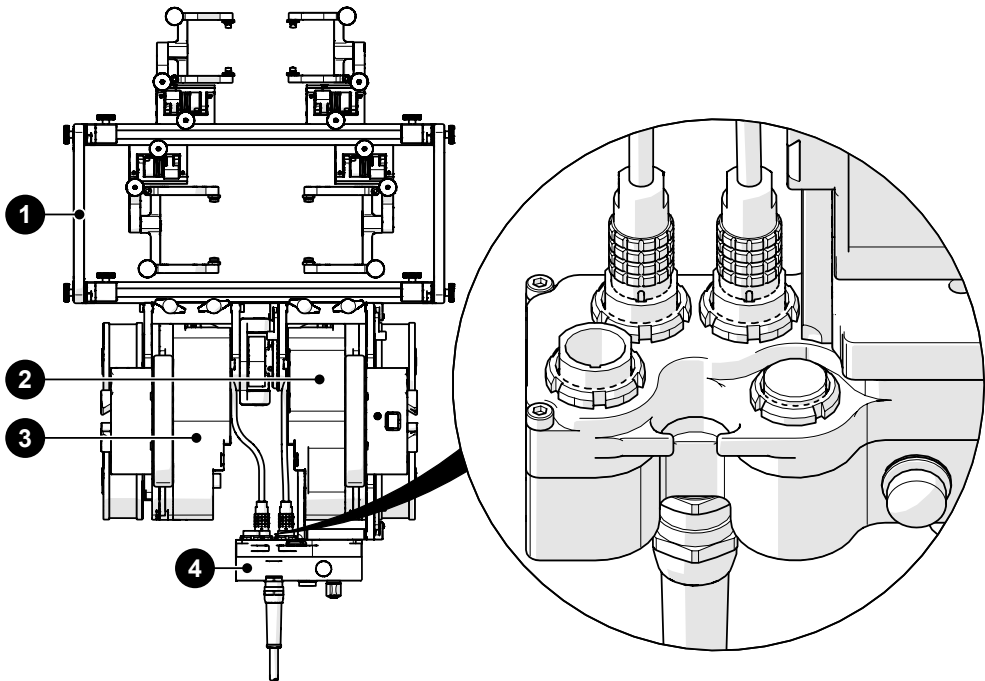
Standard crawler configuration with low profile probe holder frame
